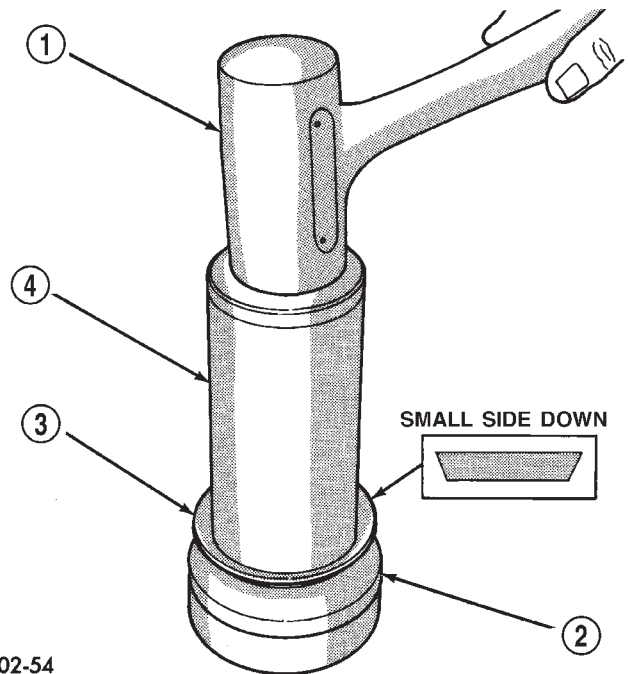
Bearing Cage & Hub Installed In Housing
